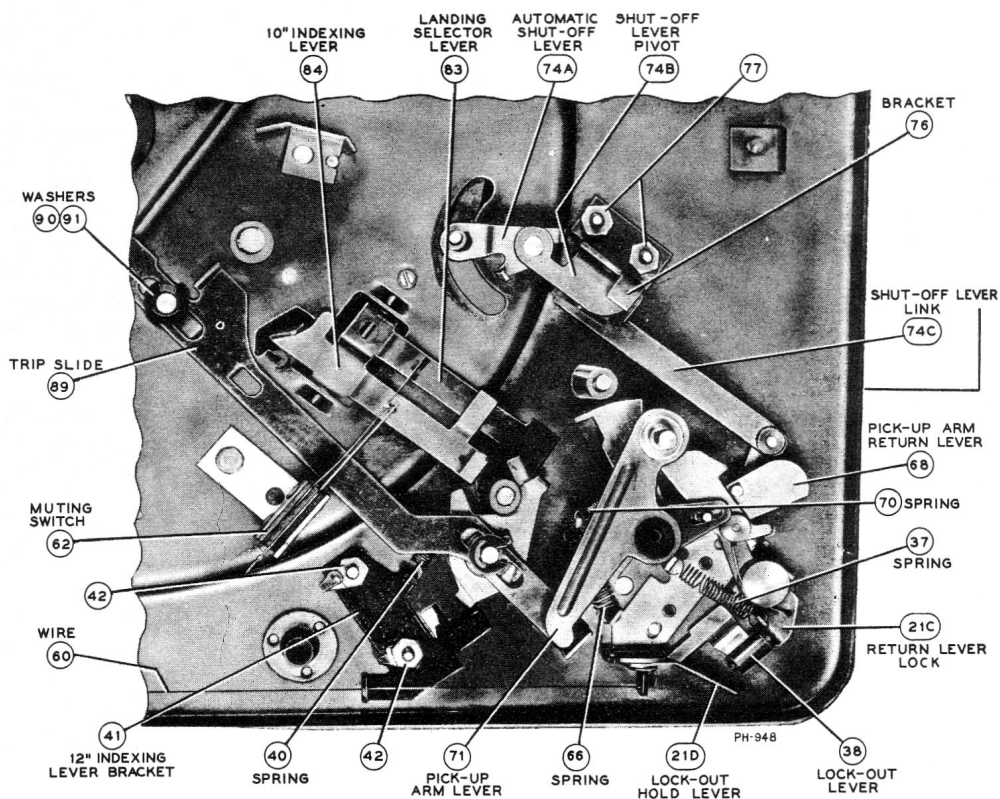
Partial Bottom View of RP-197-1 with Cycling Slide Removed
